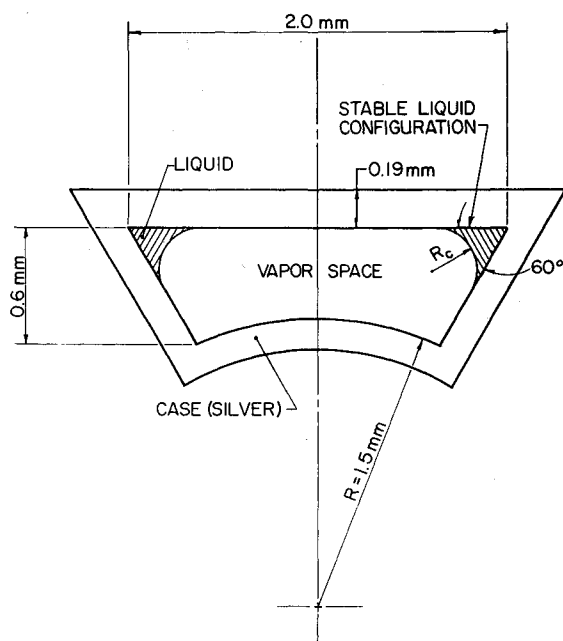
Cross-sectional shape of the modeled heat pipe.
